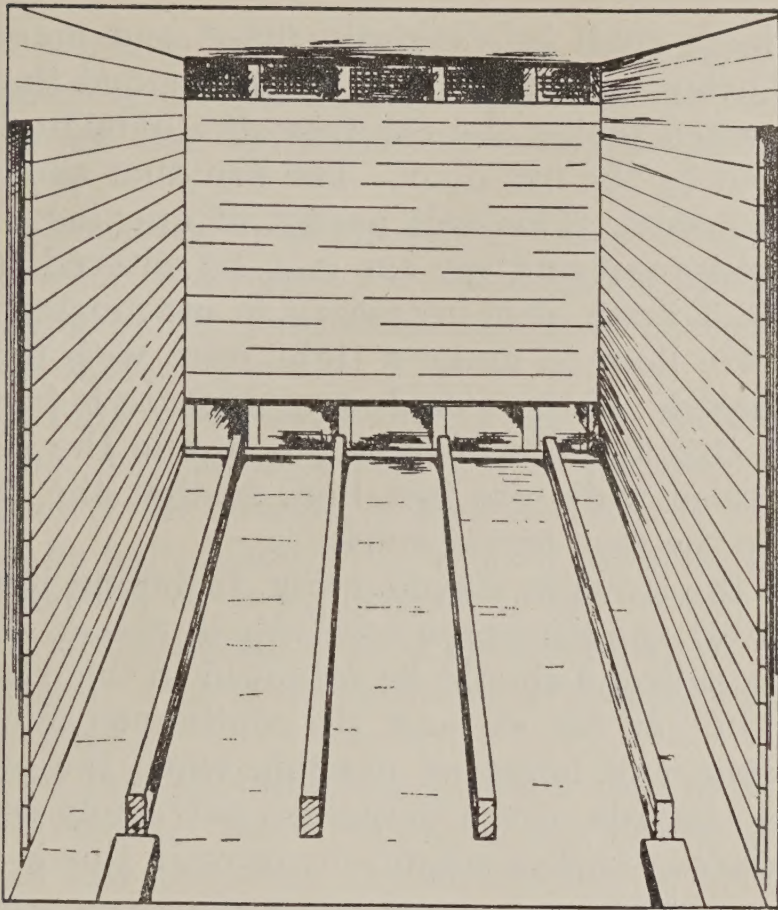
False floor stringers in place in well-constructed refrigerator car.
